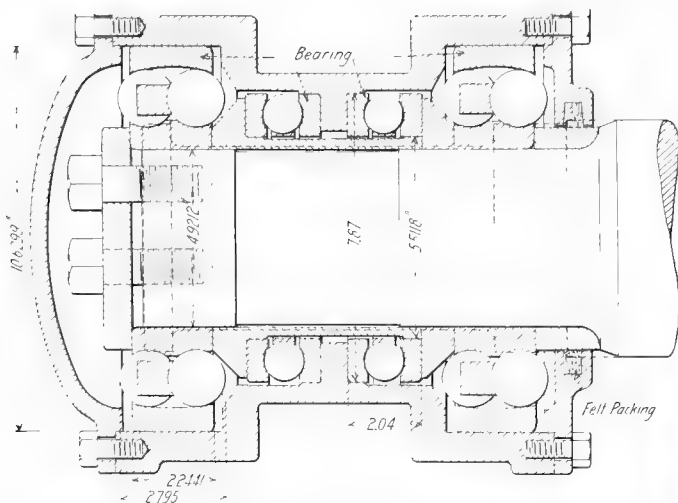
Ball Bearing for New York, New Haven & Hartford 5 in. by 9 in. Journal. S. K. F. Ball Bearing Company.
